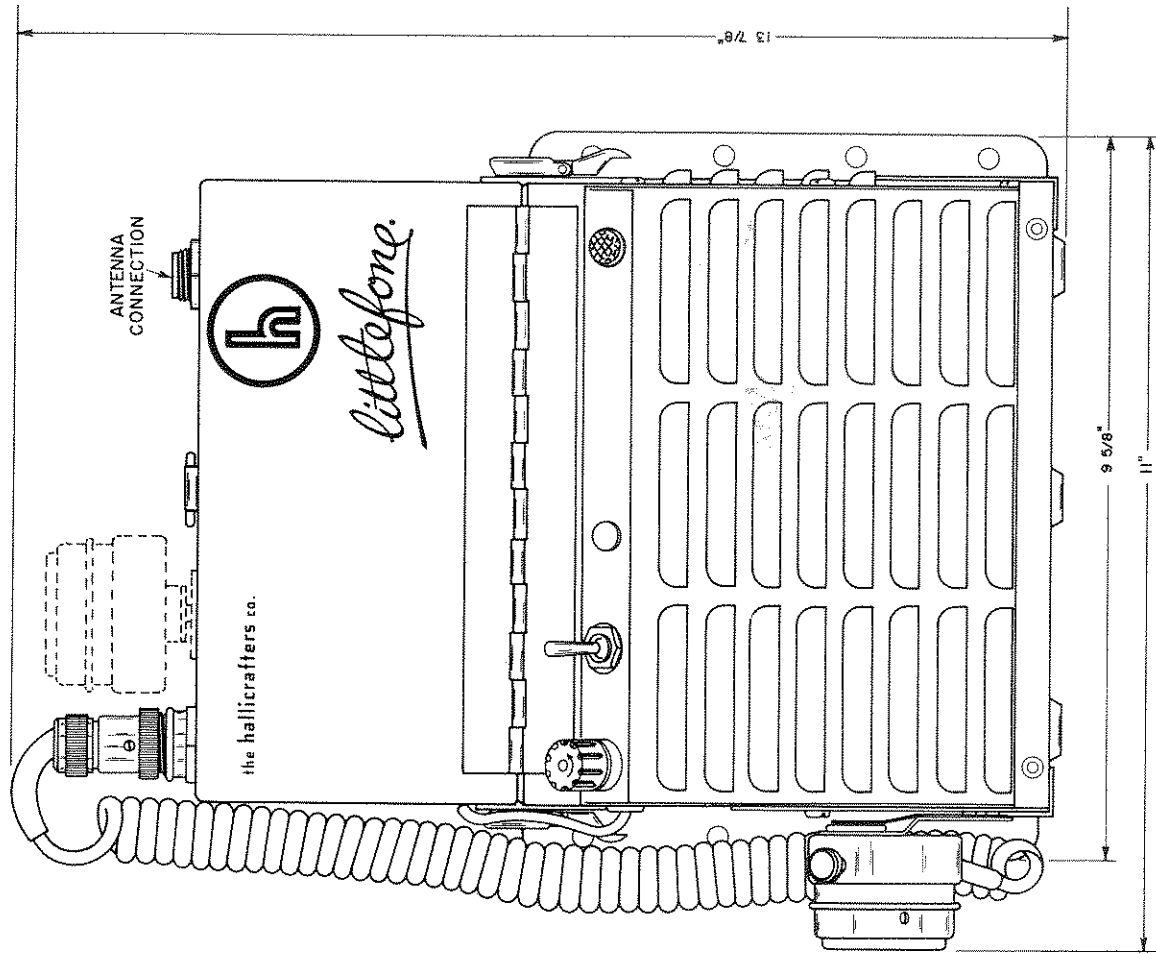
Front View of Unit (In Mtg. Bracket) Showing Dimensions
